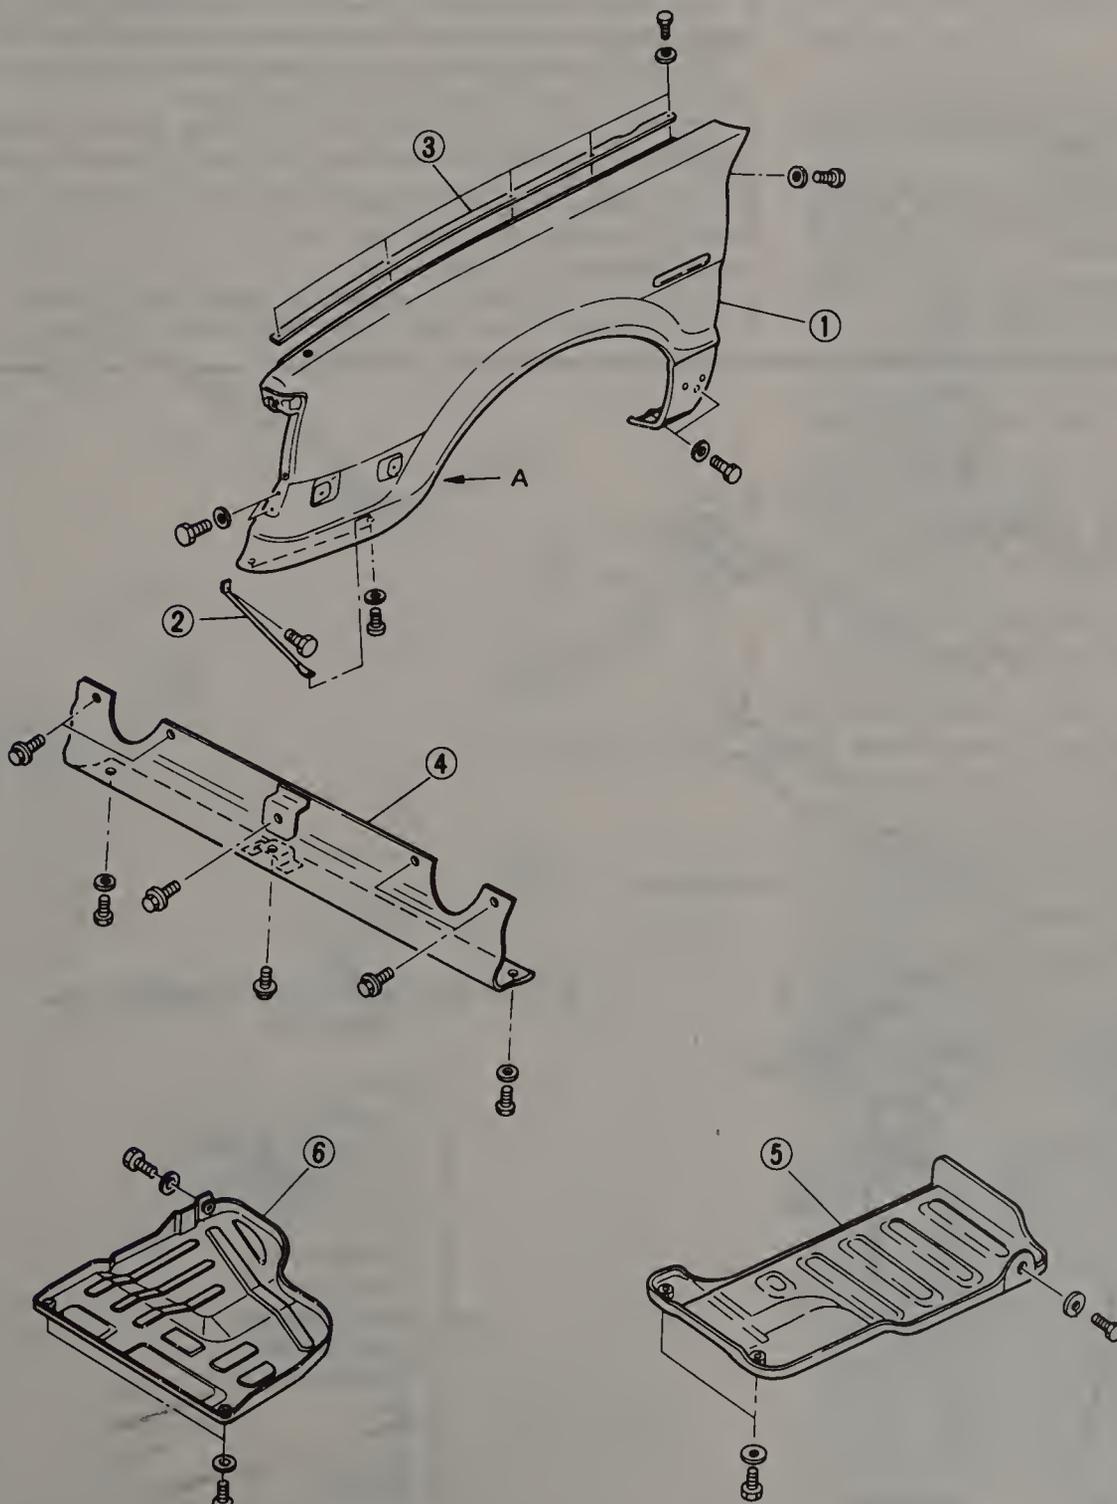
Fender, front skirt and under covers – exploded view (Sec 20)
